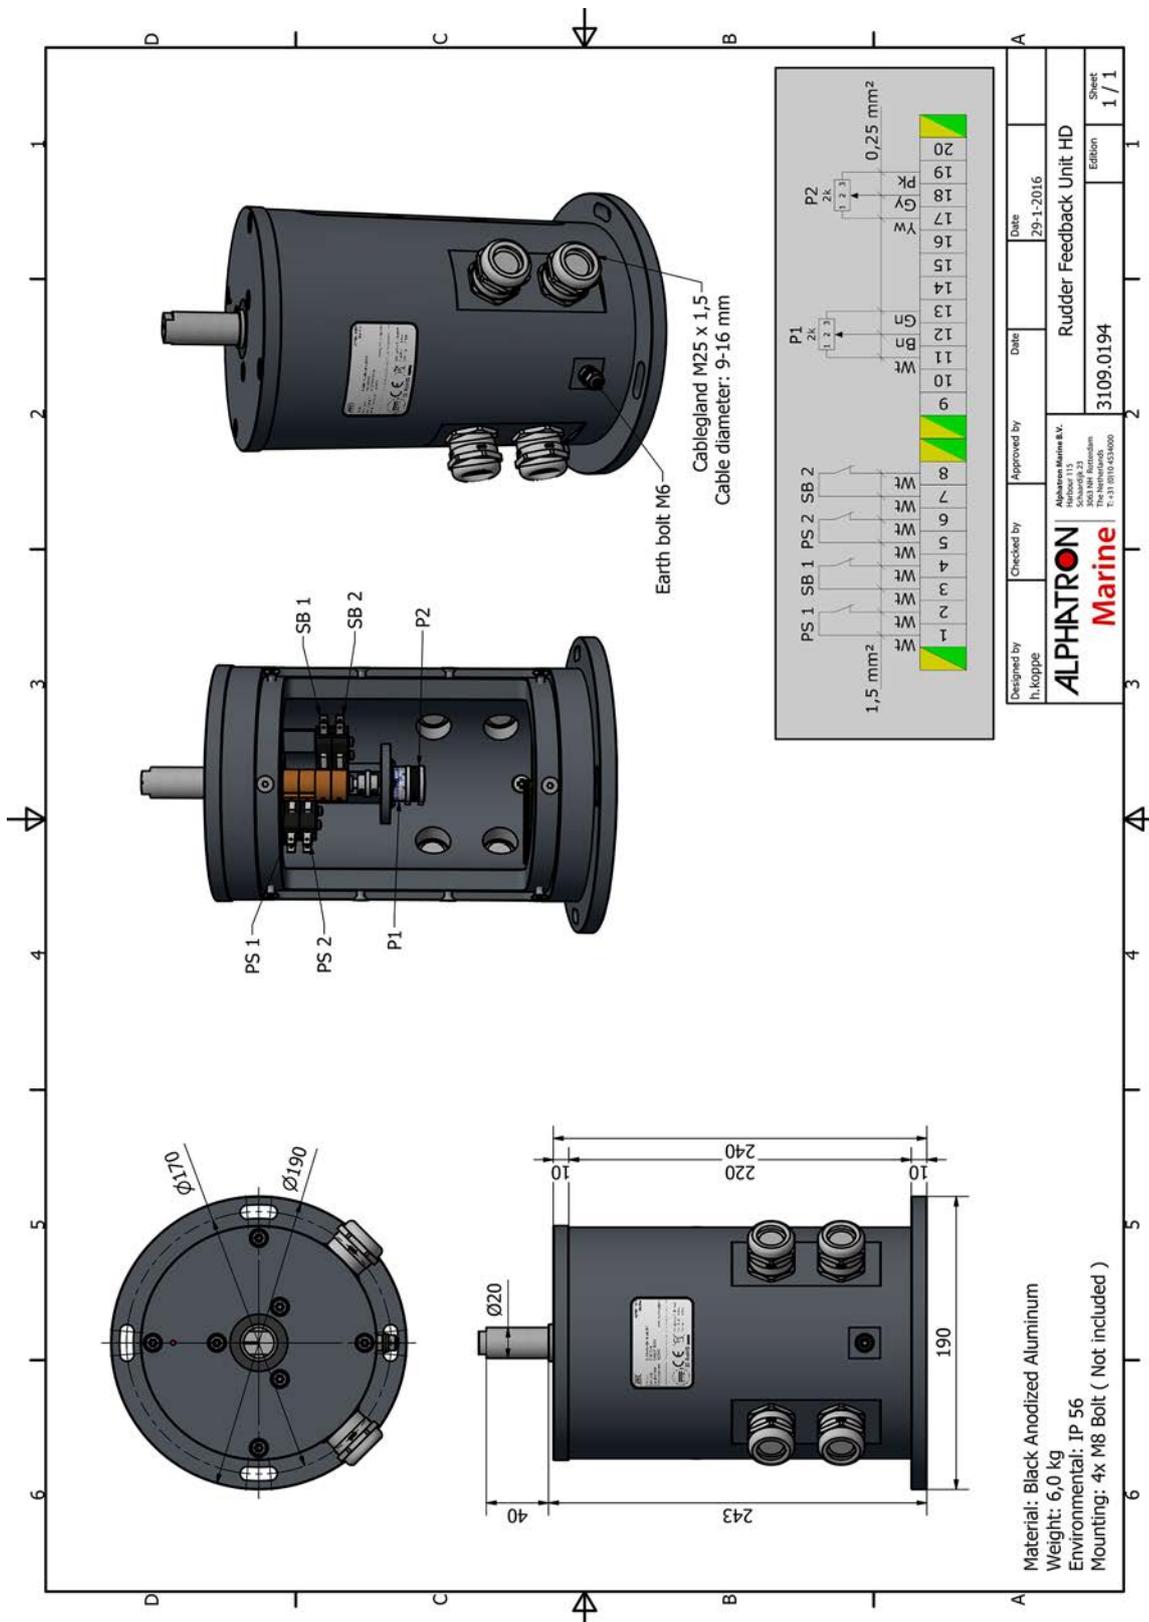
Mechanical Drawing Rudder Feedback Unit HD
